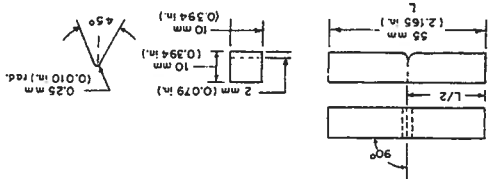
Charpy (Simple Beam) Impact Test Specimens
